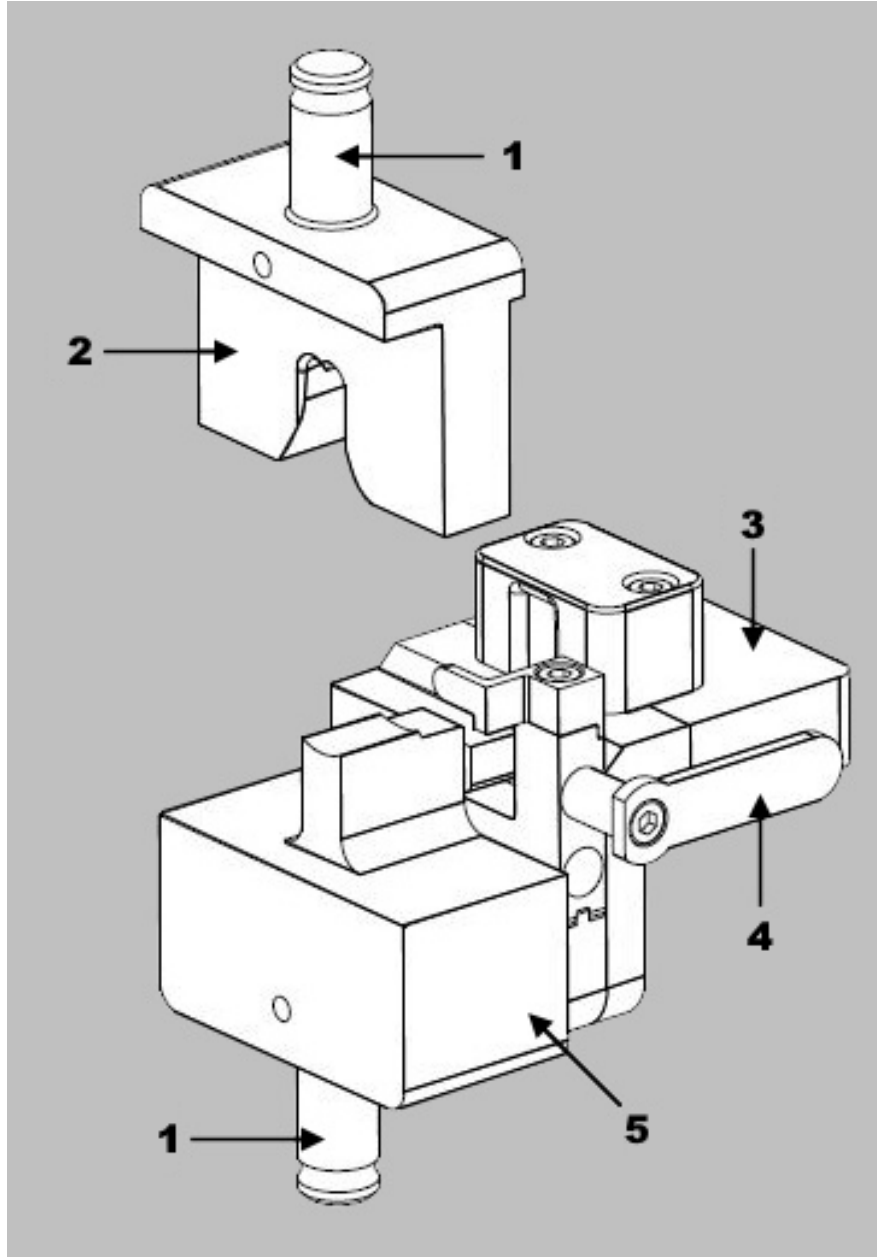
Crimping die (PN 2305855-1) and terminal locator assembly for PCON 12 terminals
